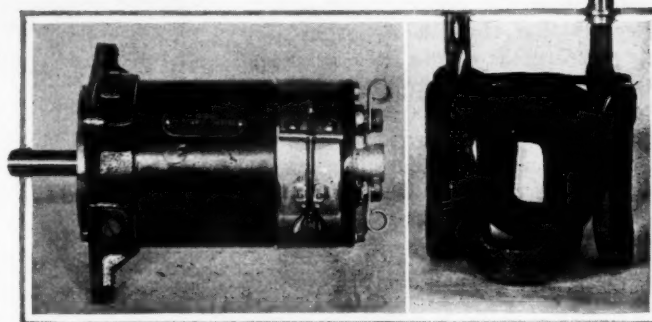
Left—Bijur starting motor with squared shaft for sliding pinion. Right—Assembly of starting motor field coils
